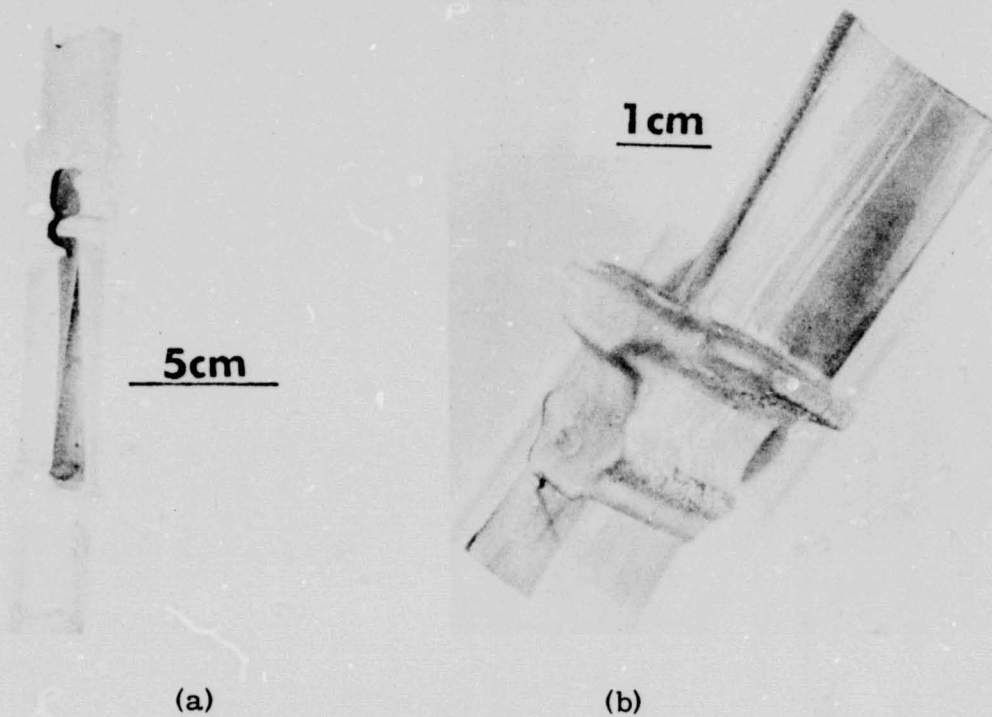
Macrographs of Mold-Metal Reactivity Tests of γ - γ' Alloy 20 Alumina Shell Mold, a) Tandem Casting and b) Etched TF34 Shape
